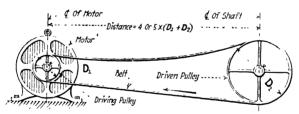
Determining the distance which a motor should be set from the shaft which it drives.
